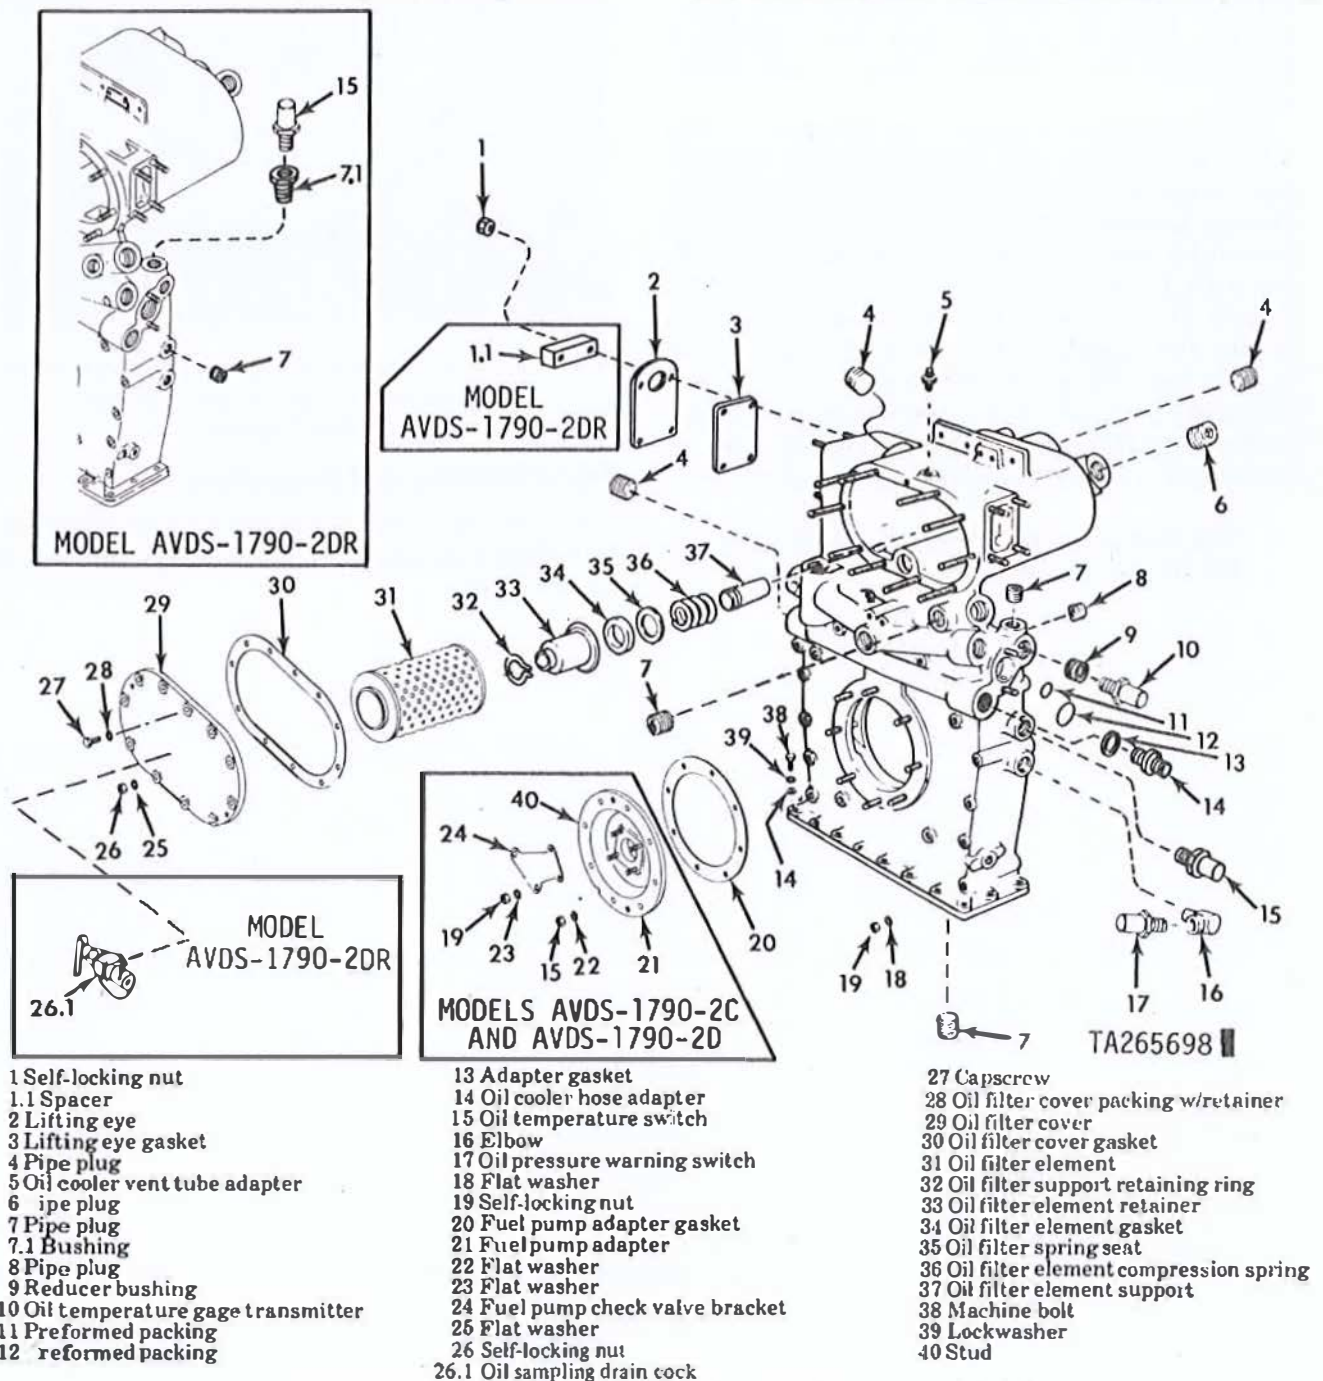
Damper housing oil filter and associated parts — exploded view.
